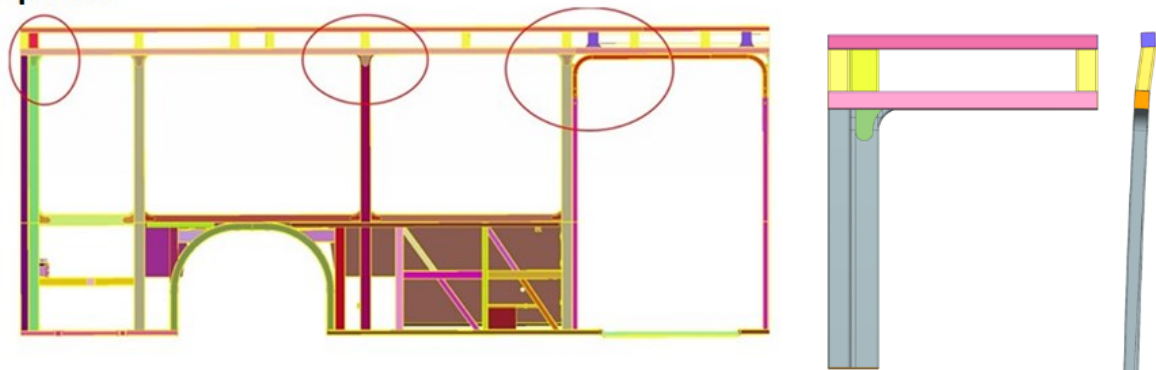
CAD model of bus bodywork (left), CAD detail for testing (right)
